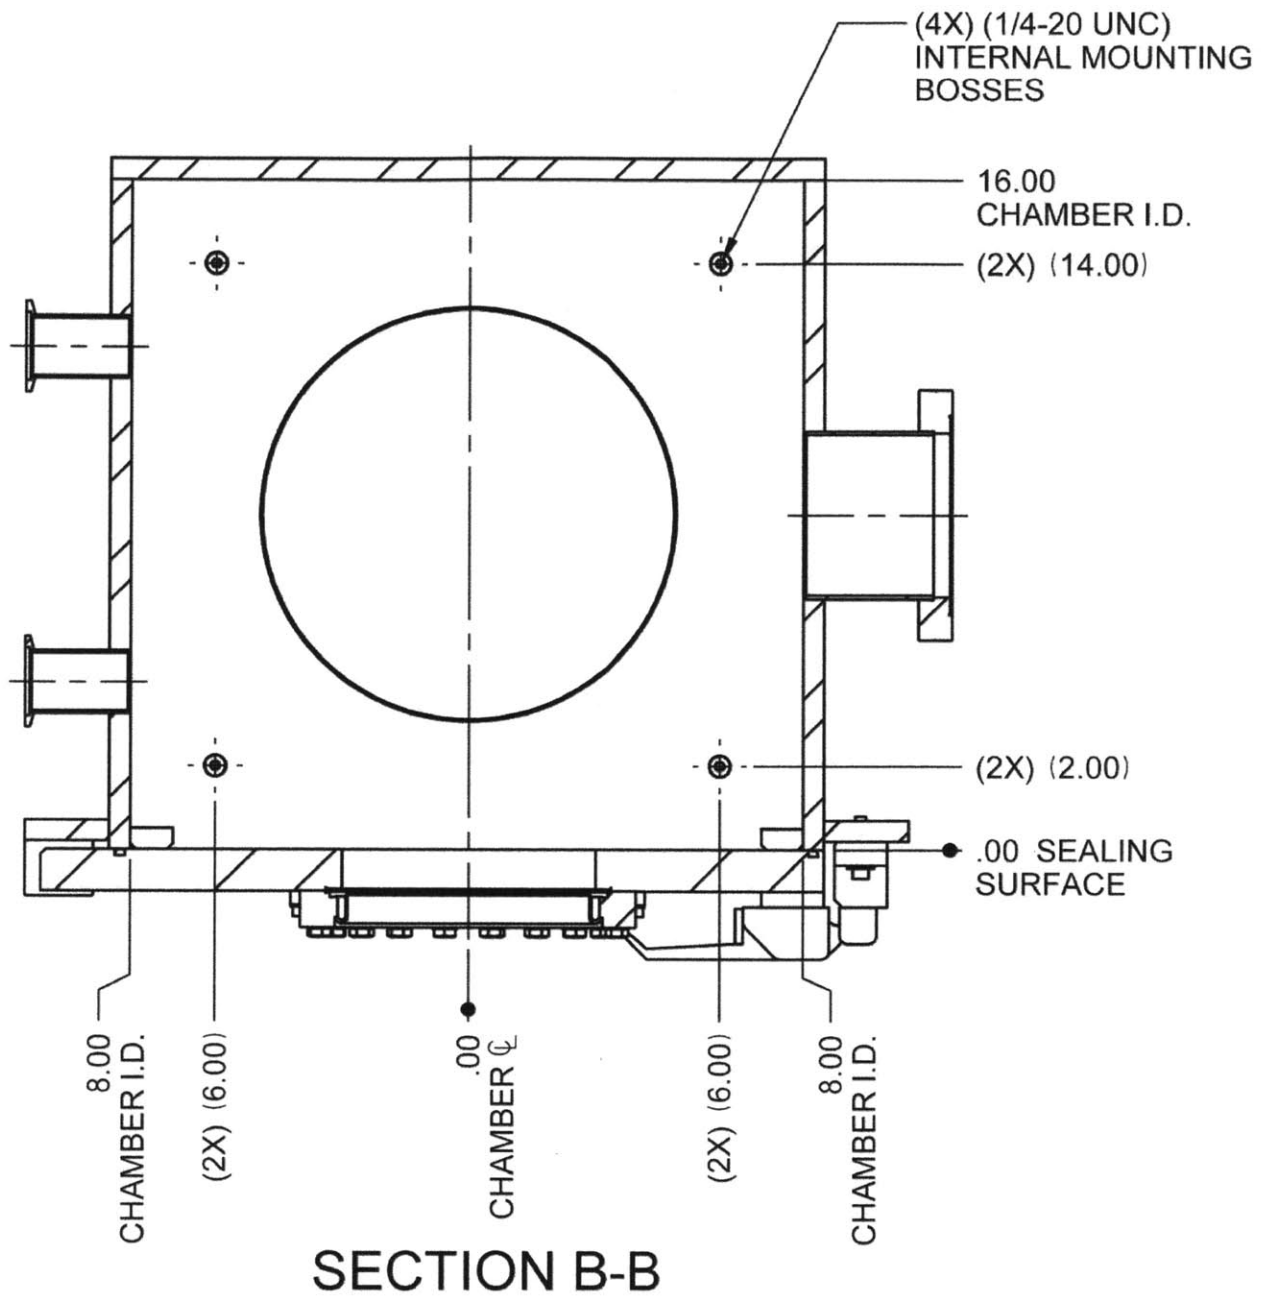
oCVD reactor chamber engineering drawing—cross sectional view from top.
